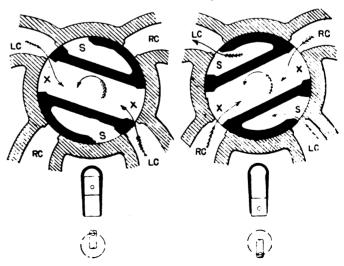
ROTARY GAS AND EXHAUST VALVES.
